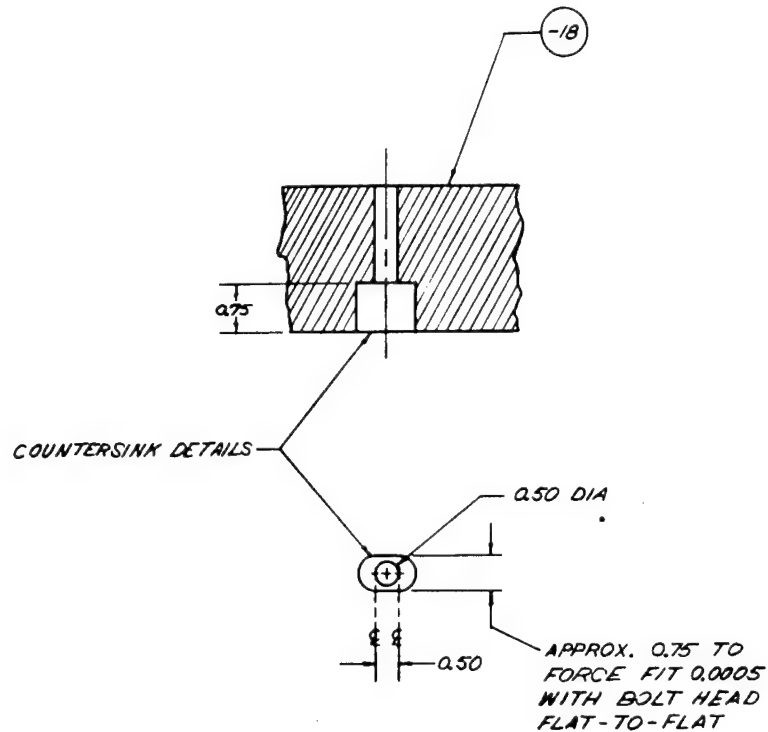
Dwg, S-3A Ballast Block, -4 Block
